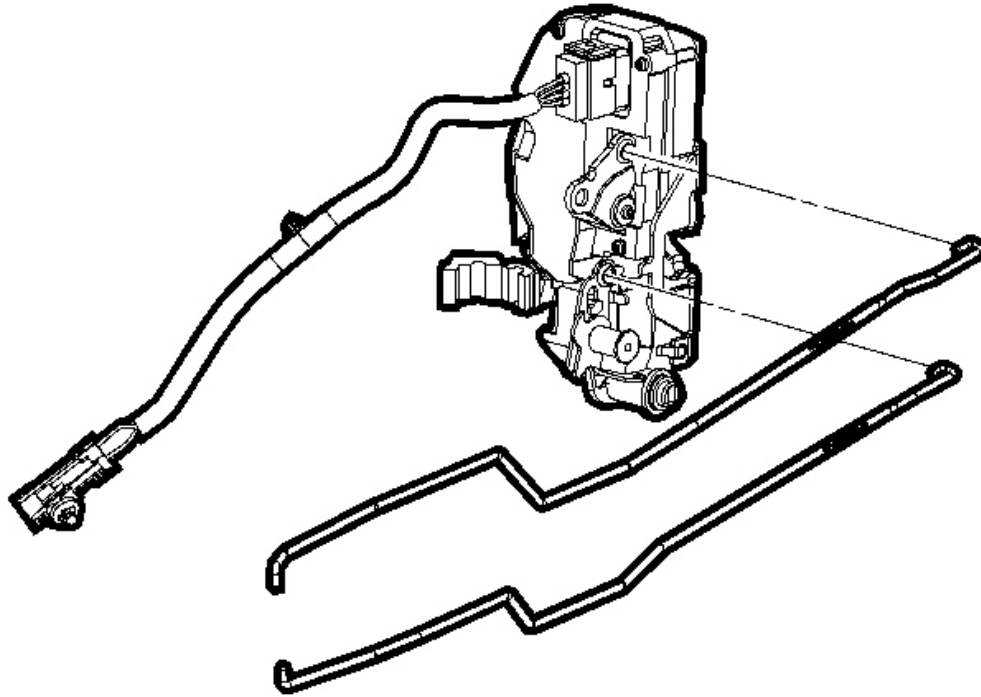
Disconnect/Connect Inside Handle Rod & Lock Rod From Latch Assembly
